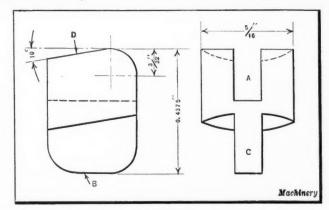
Chain Link milled from Cylindrical Blanks in Four Operations
